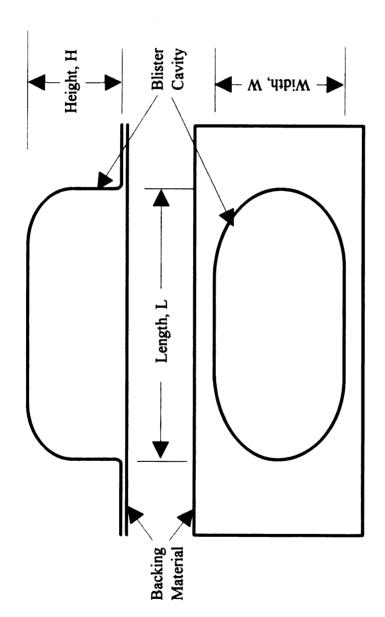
Schematic showing measurement of dimensions of a blister cavity
